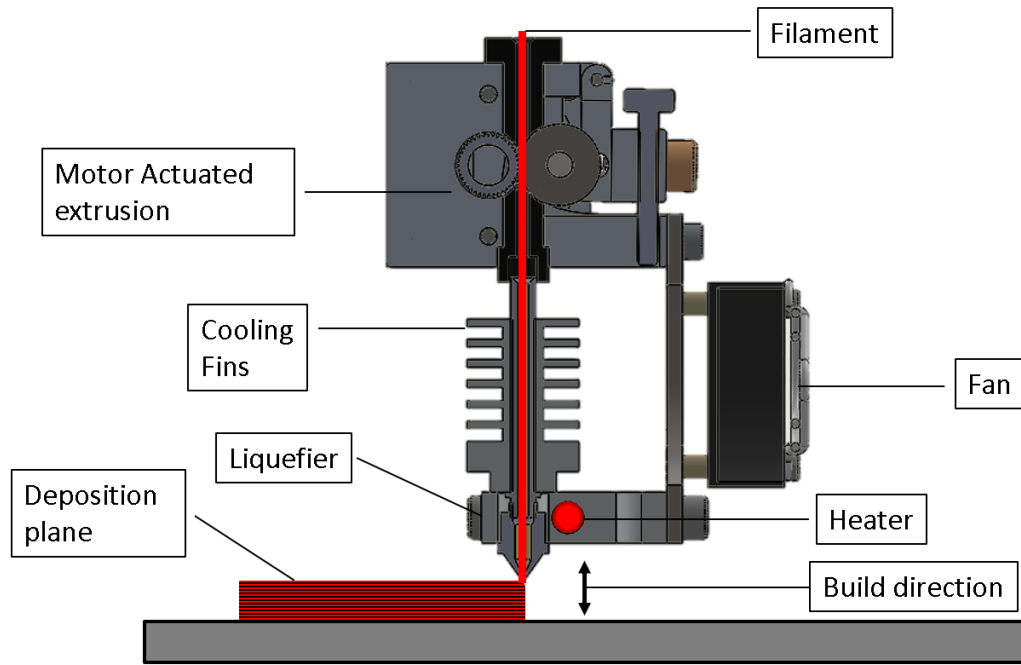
Fused deposition modeling print-head showing the build direction and plane
